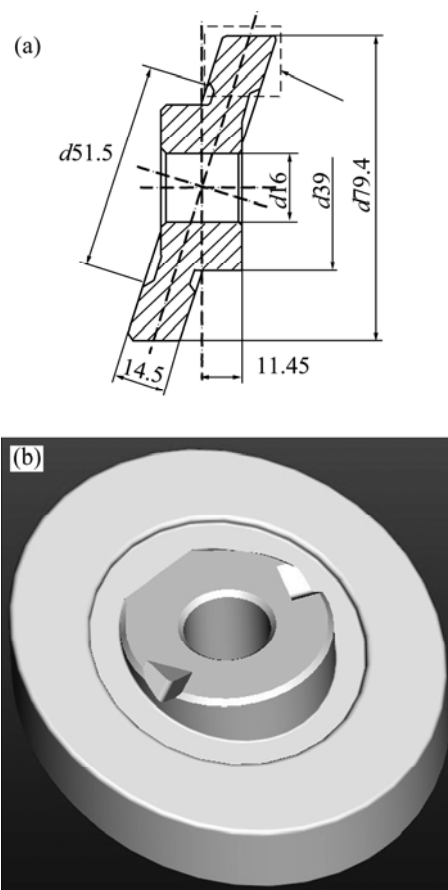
Squeeze casting swash plate for air conditioning compressor of cars: (a) Simplified drawing; (b) 3D drawing (The arrow shows the sampling position.)
